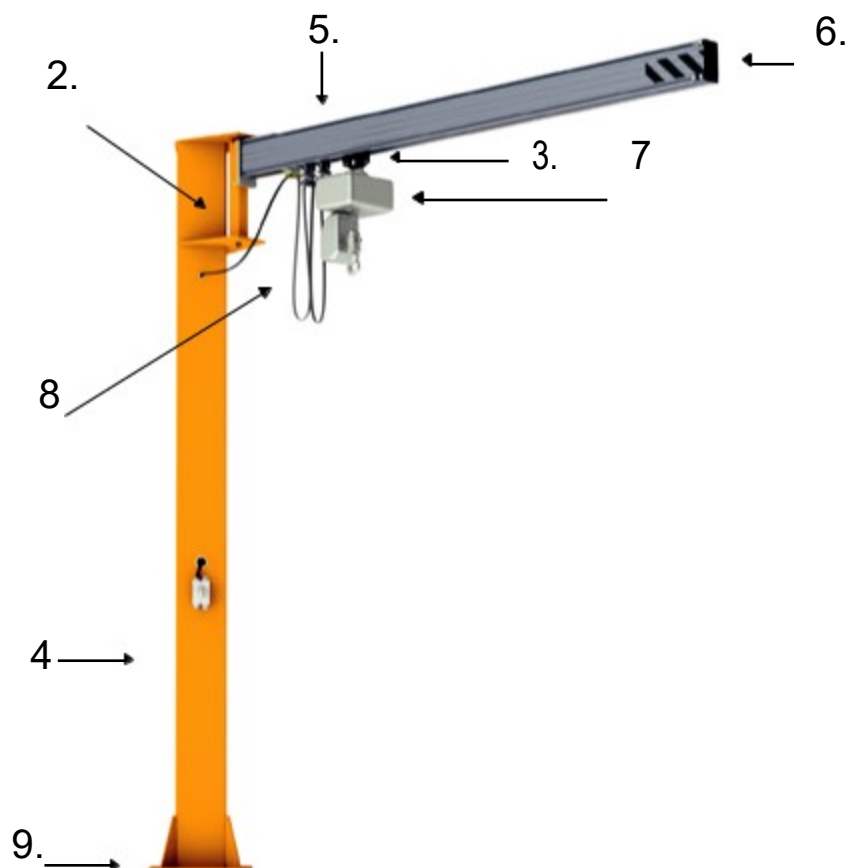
Column-mounted jib crane for low headroom applications, aluminium
